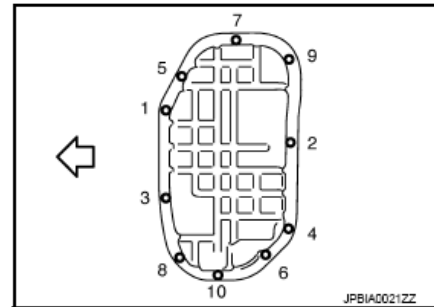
Identifying Oil Pan (Lower) And Oil Strainer Mounting Bolts Tightening Sequence
